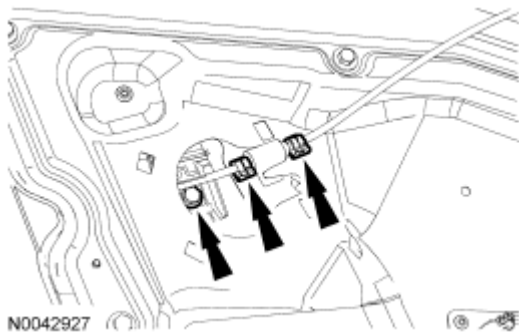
Locating B-Pillar Window Glass Clamp Bolt And Door Latch Cable Retainers
